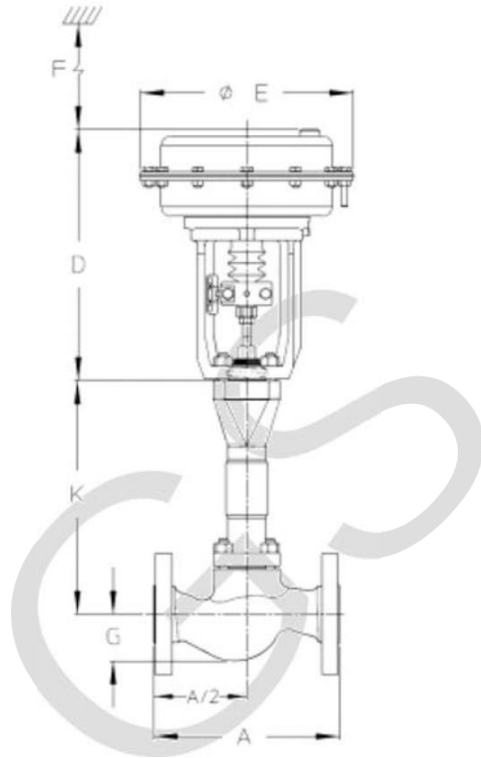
MK-GS Extended Bonnet Valve Dimension Drawing
